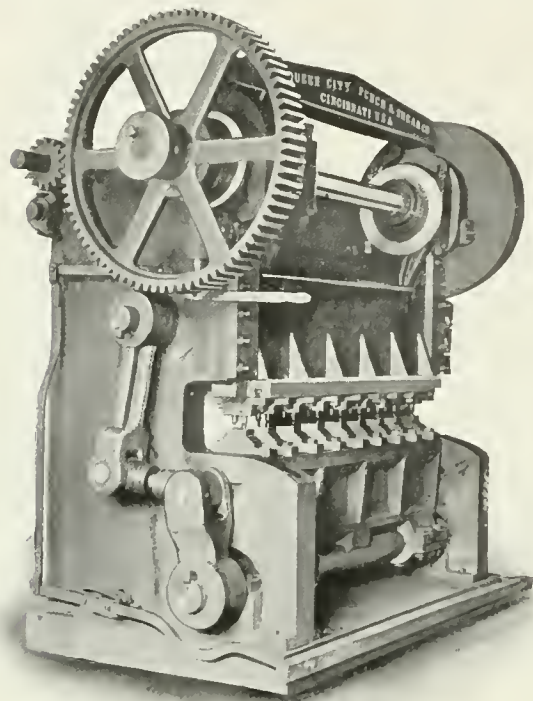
Large Forming Press built by the Queen City Punch & Shear Co.
